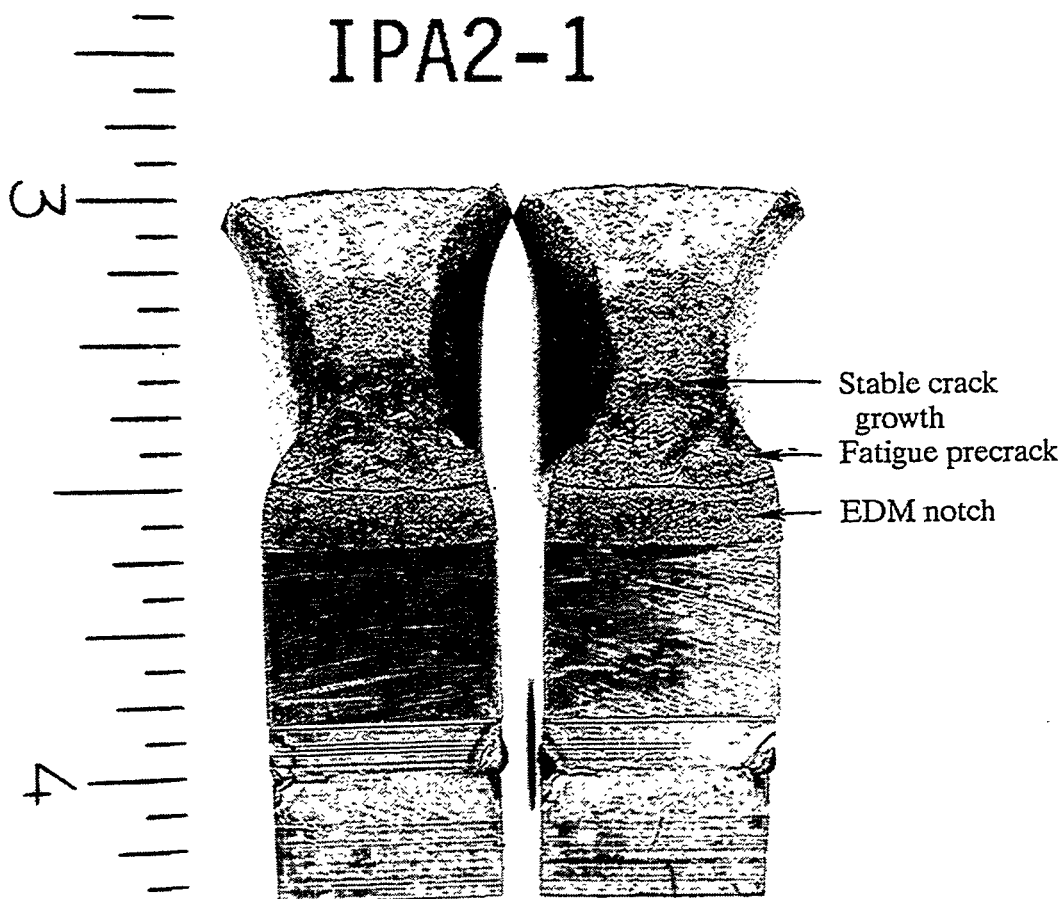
Fracture surfaces of C(T) Specimen IPA2-1, illustrating extensive thickness reduction during stable crack growth (scale in inches)
